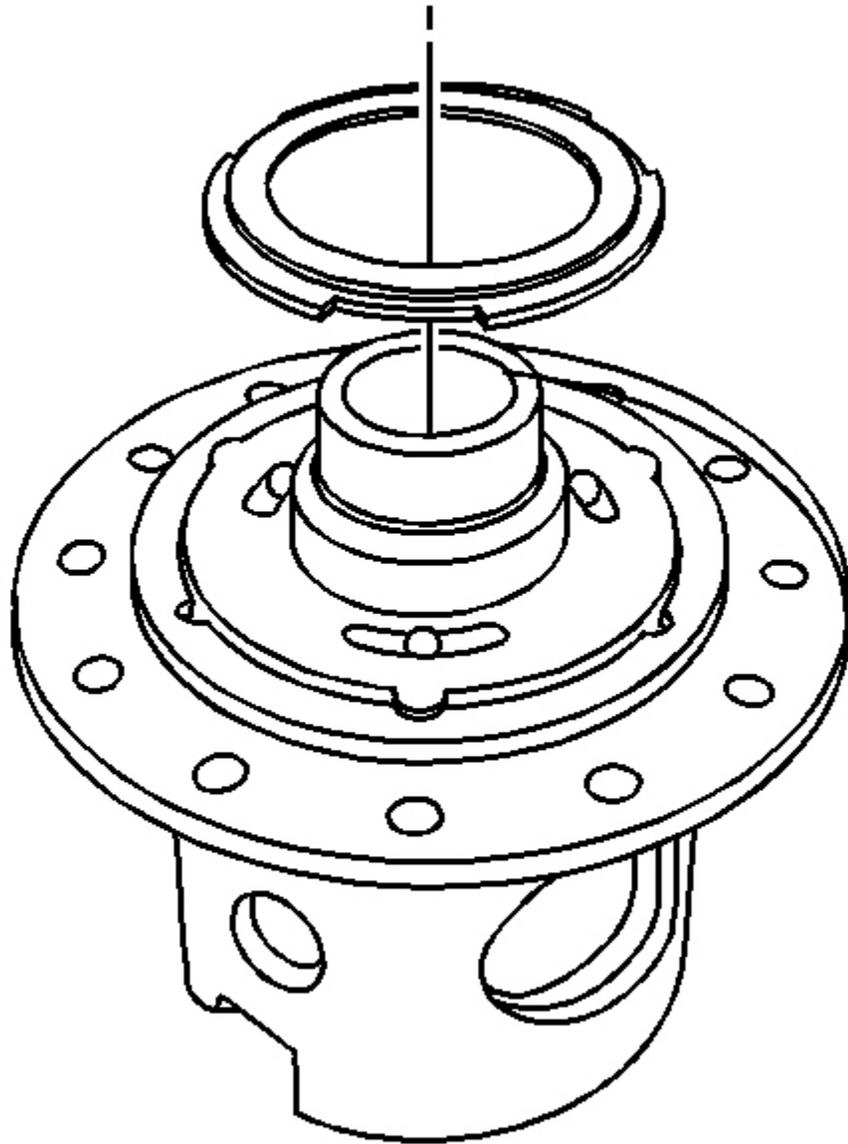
Outboard Locking Differential Ball Bearing Plate
